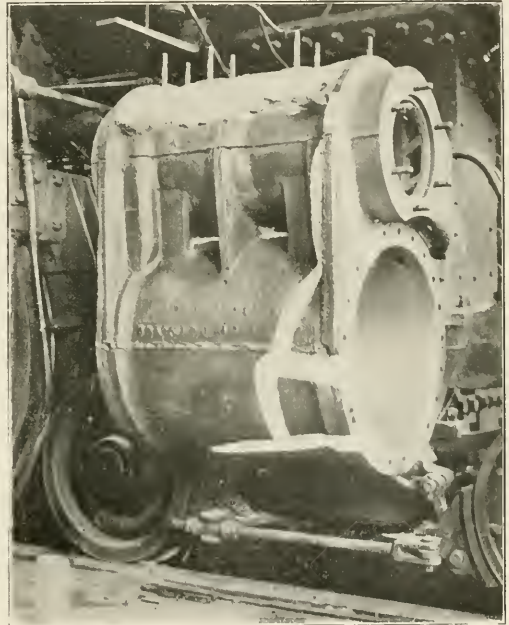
Locomotive Cylinder Oxyacetylene Welded
